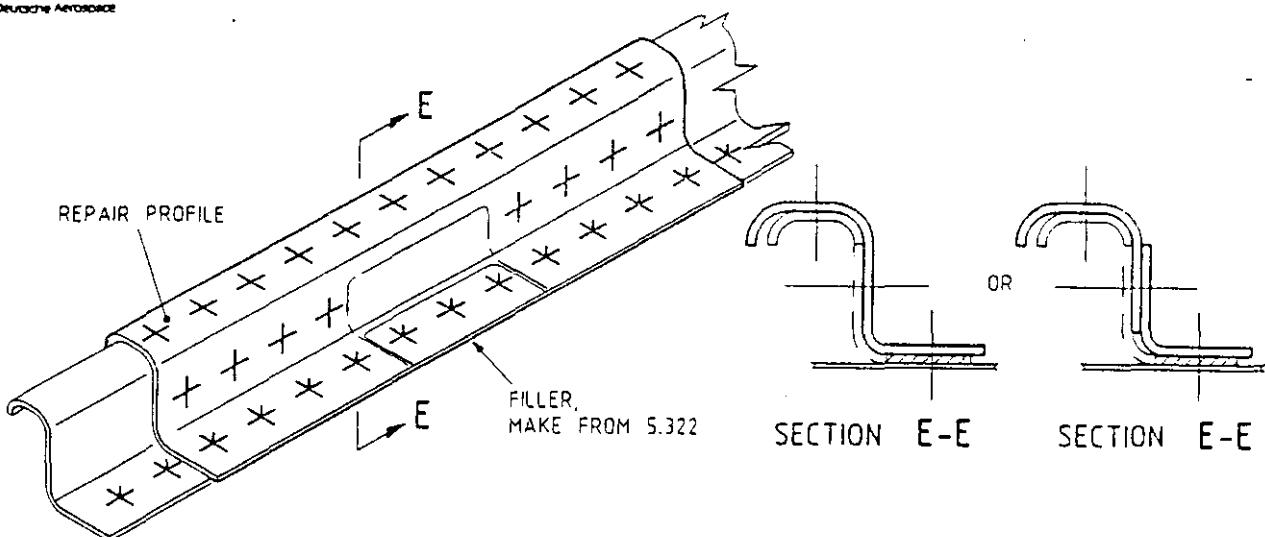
Repair of Formed Stringers; ORIGINALLY RIVETTED STRINGERS
